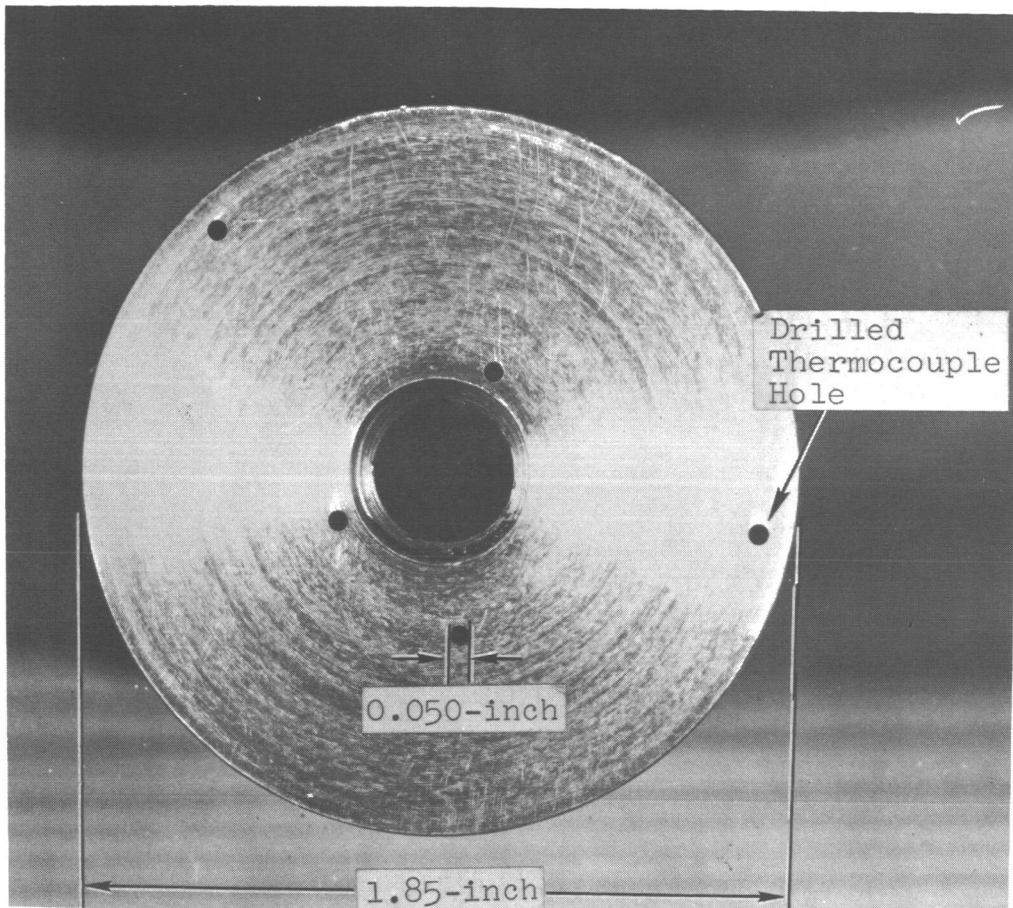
End View of 3/8-inch ID Condenser Tube Showing Drilled Thermocouple Holes
